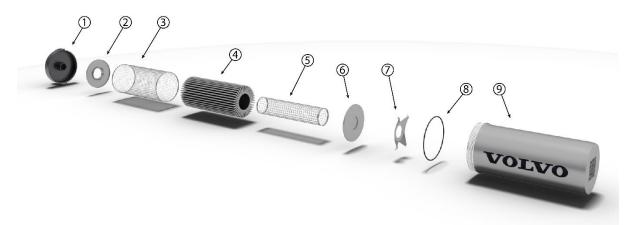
Exploded view, concept filter: (1) Transportation lid (2) Filter element cap (3) Outer tube (4) Filter element (5) Inner tube (6) Filter element cap (7) Bypass spring (8) Gasket (9) Canister
